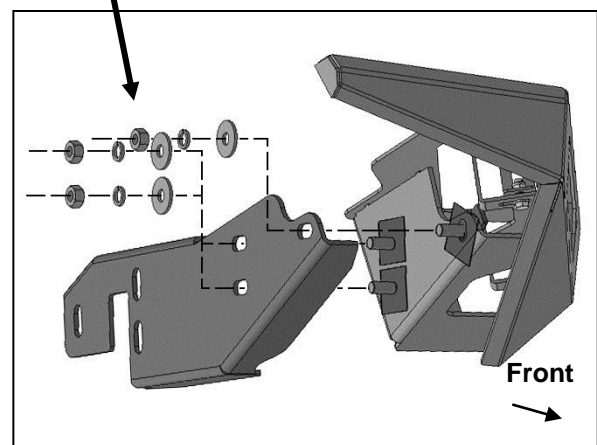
Insert Single and Double Bolt Plate into and through back of Wing assembly
